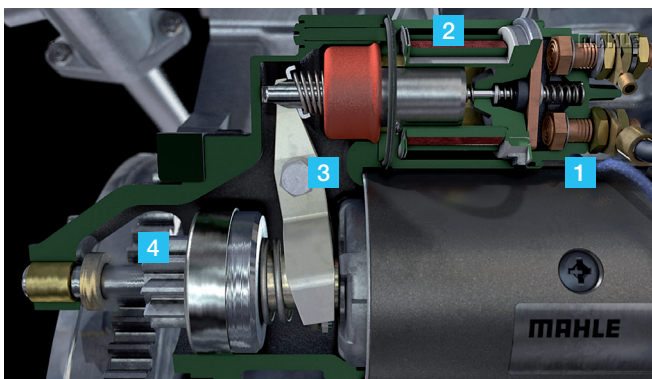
Cross section of starter motor with contact bridge (1), solenoid (2), engaging lever (3), and pinion with freewheel clutch (4)
